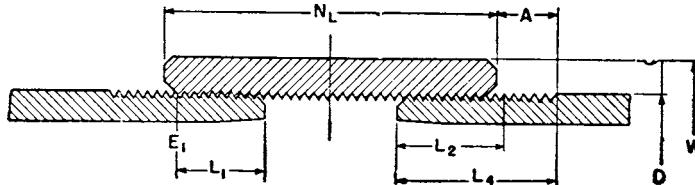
Dimensions of Hand Tight Assembly for Use with Table X3.1
